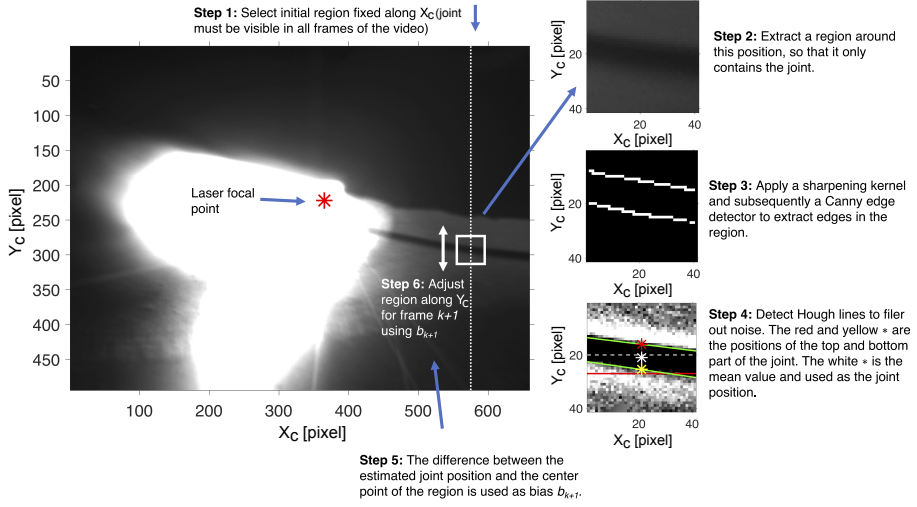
Video frame captured during laser welding, detailing the five steps for locating the joint. Reprinted from [4], licensed under CC BY-NC-ND 4.0.
